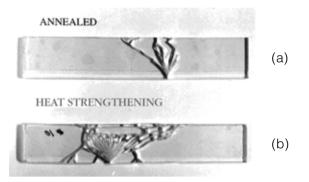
(a) Fracture pattern for Twin Cut edge before heat strengthening; (b) fracture pattern for Twin Cut edge after heat strengthening
